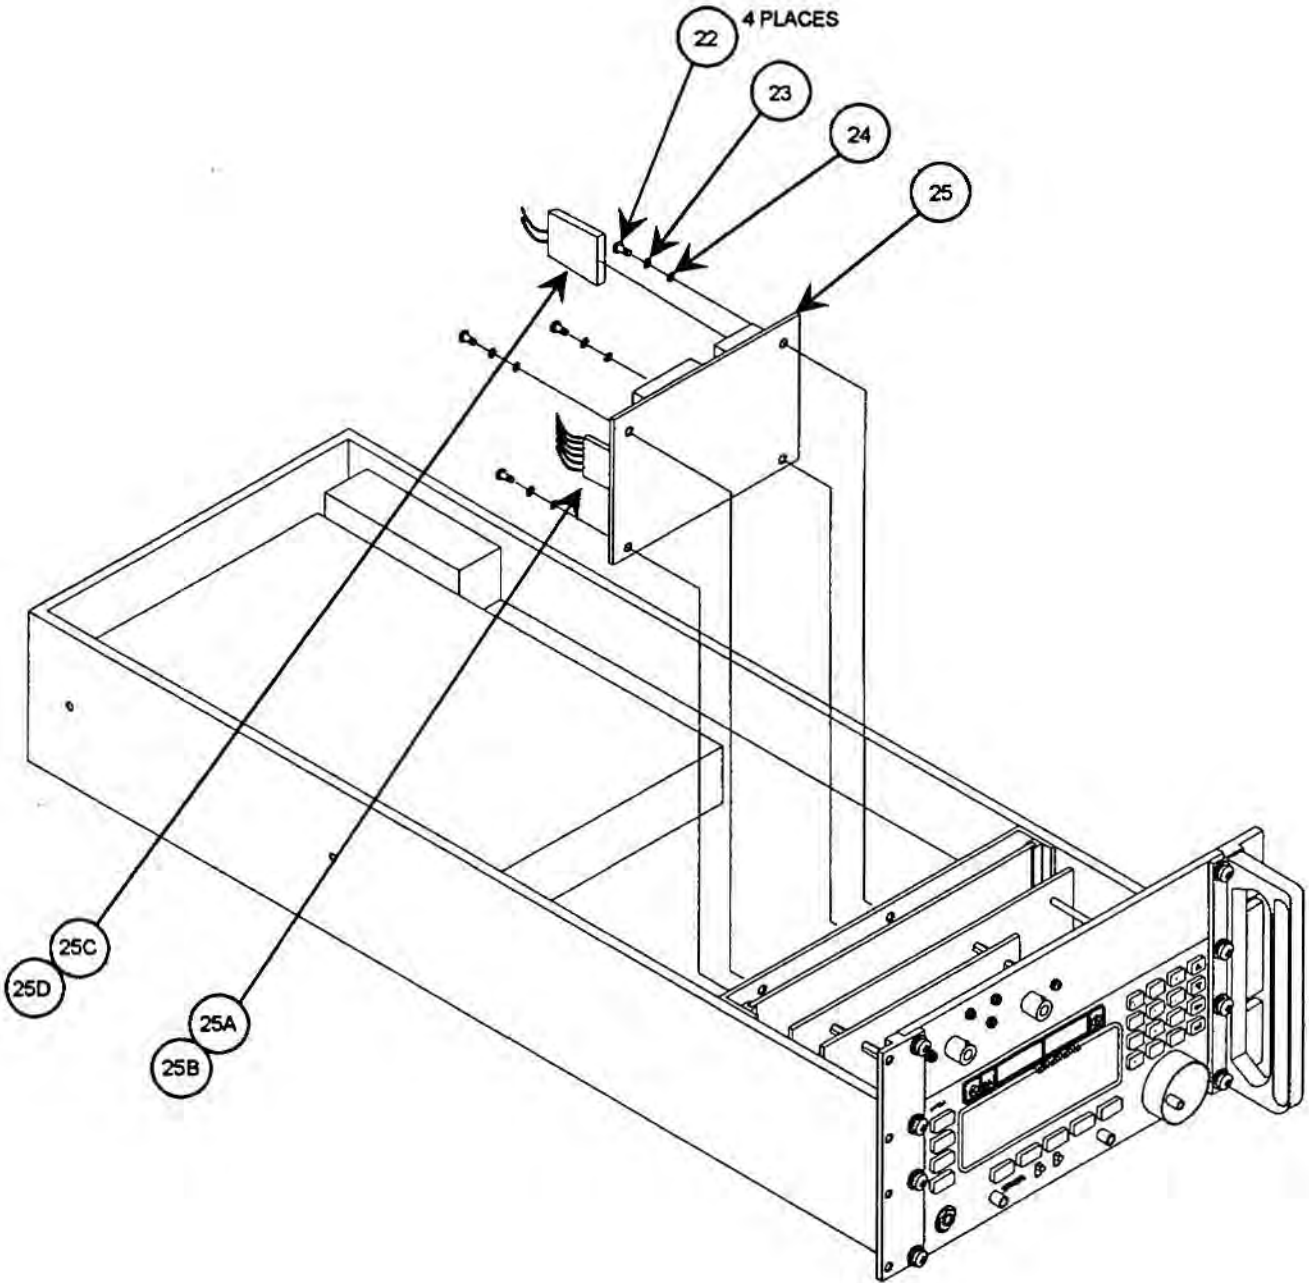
WJ-9902-2 Receiver Controller Assembly Parts Location
